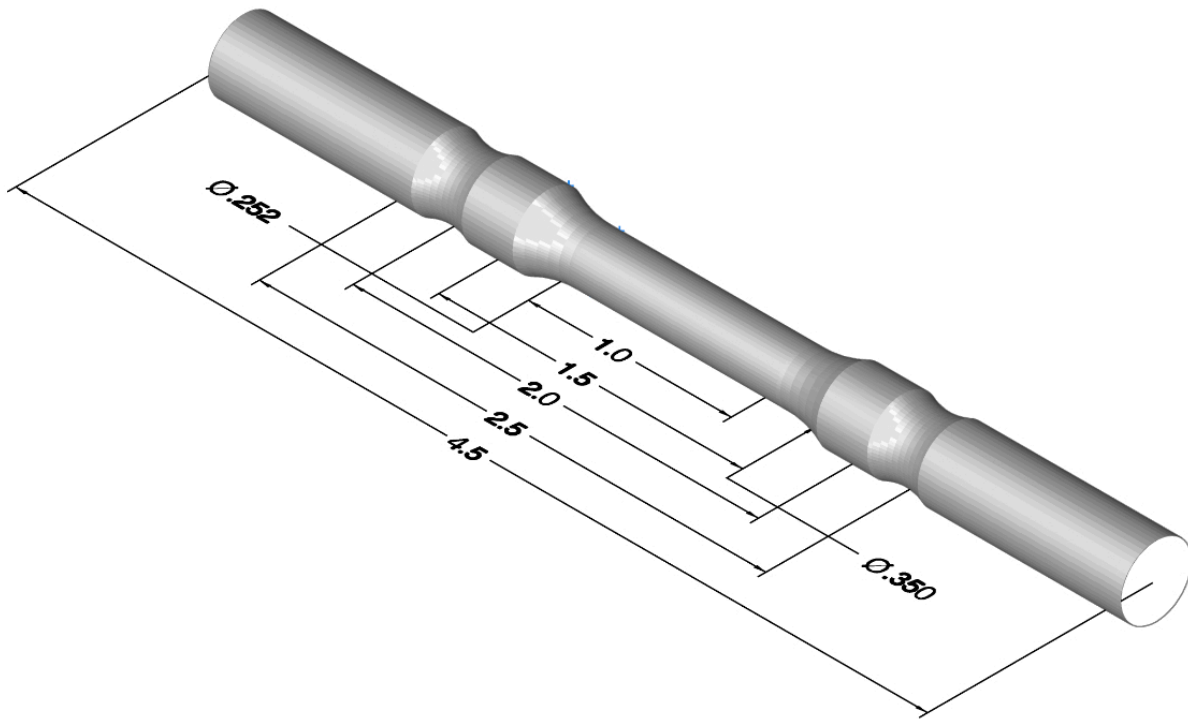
Schematic drawing of creep-rupture specimen produced for this research investigation; specimen dimensions are in inches.
